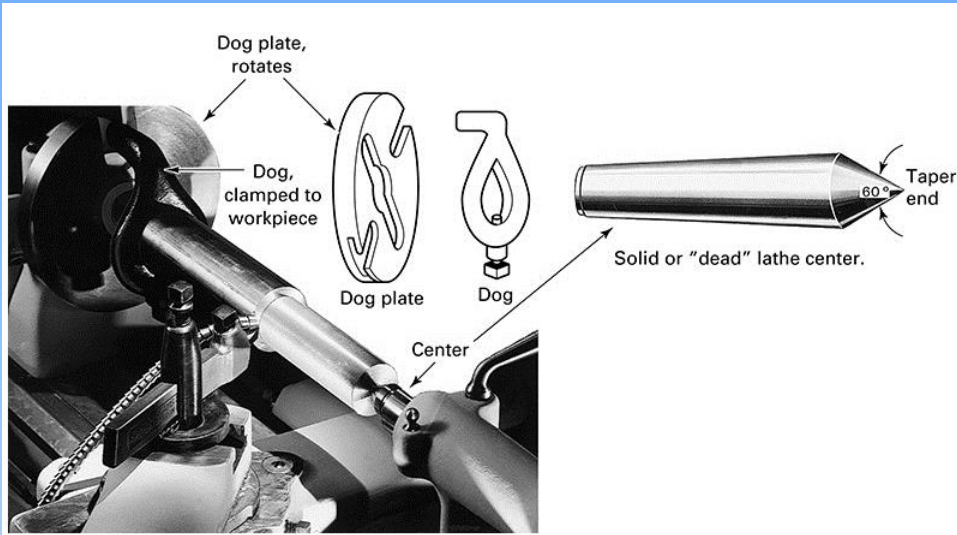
Work being turned between centers in a lathe, showing the use of a dog and dog plate. (Courtesy of South Bend Lathe.)
